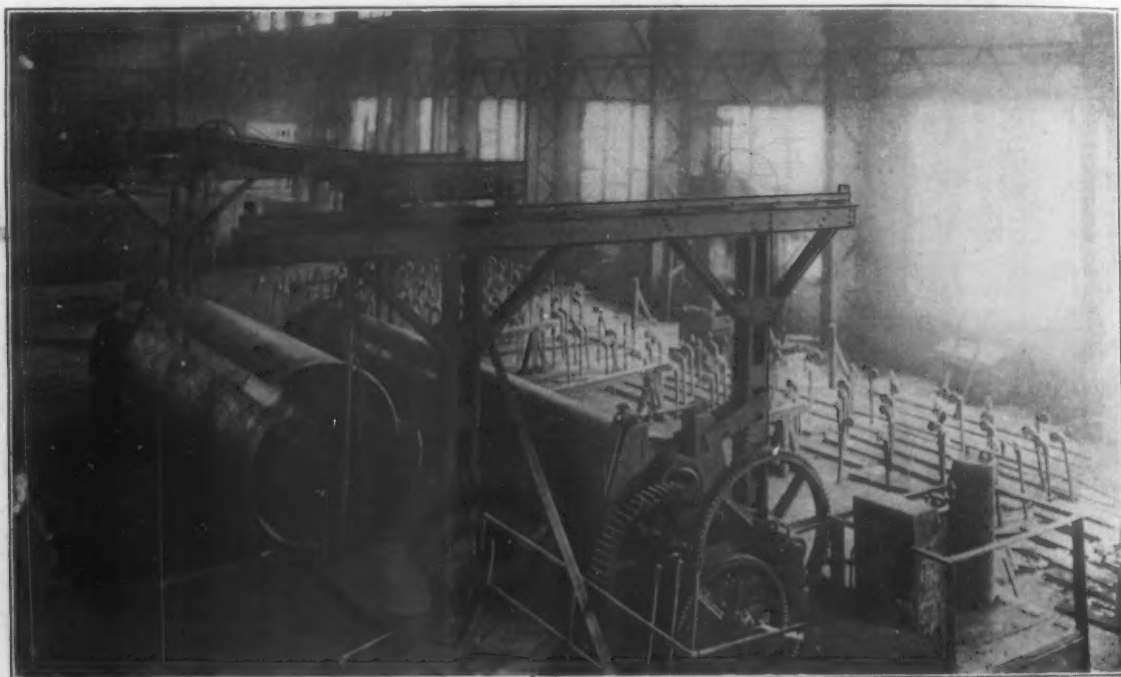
The 32-Ft. Horizontal Bending Rolls Installed in the Boiler Shop of the Cambria Steel Company, Johnstown, Pa.
